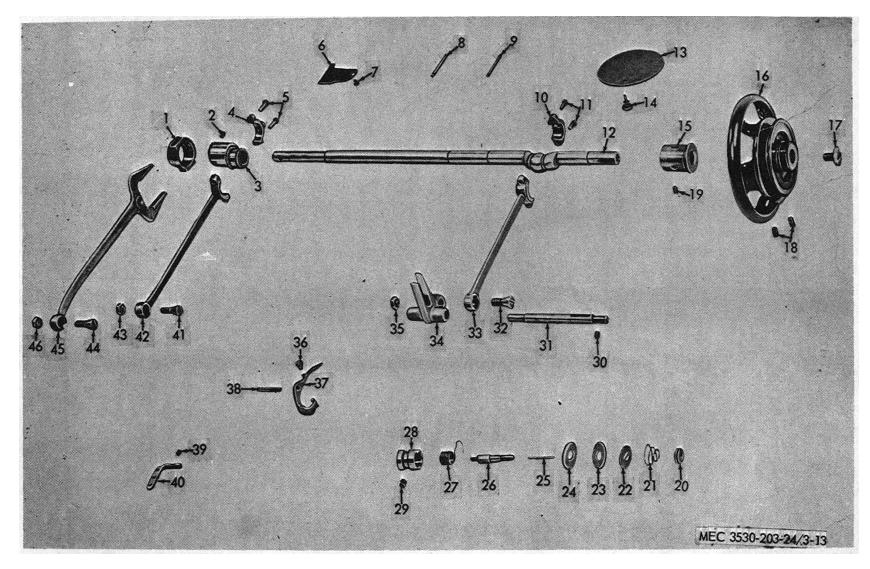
Clothing sewing machine oscillating rockshaft and crank, feed fork, and crank rods.
